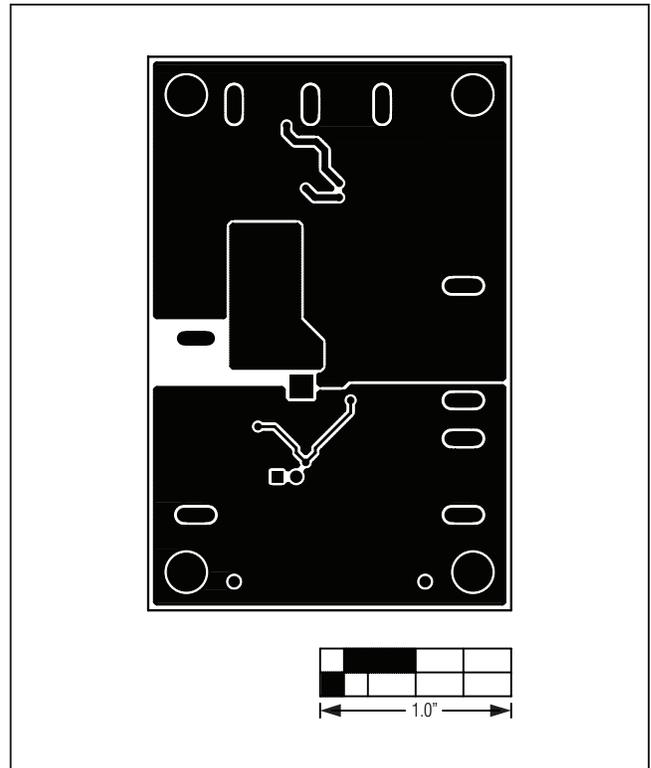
MAX17512 EV Kit PCB Layout—Layer 5
